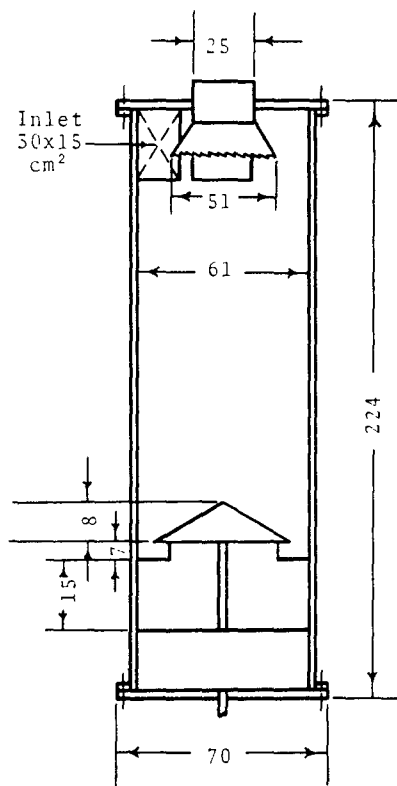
Cyclone assembly. All dimensions are in cm.
